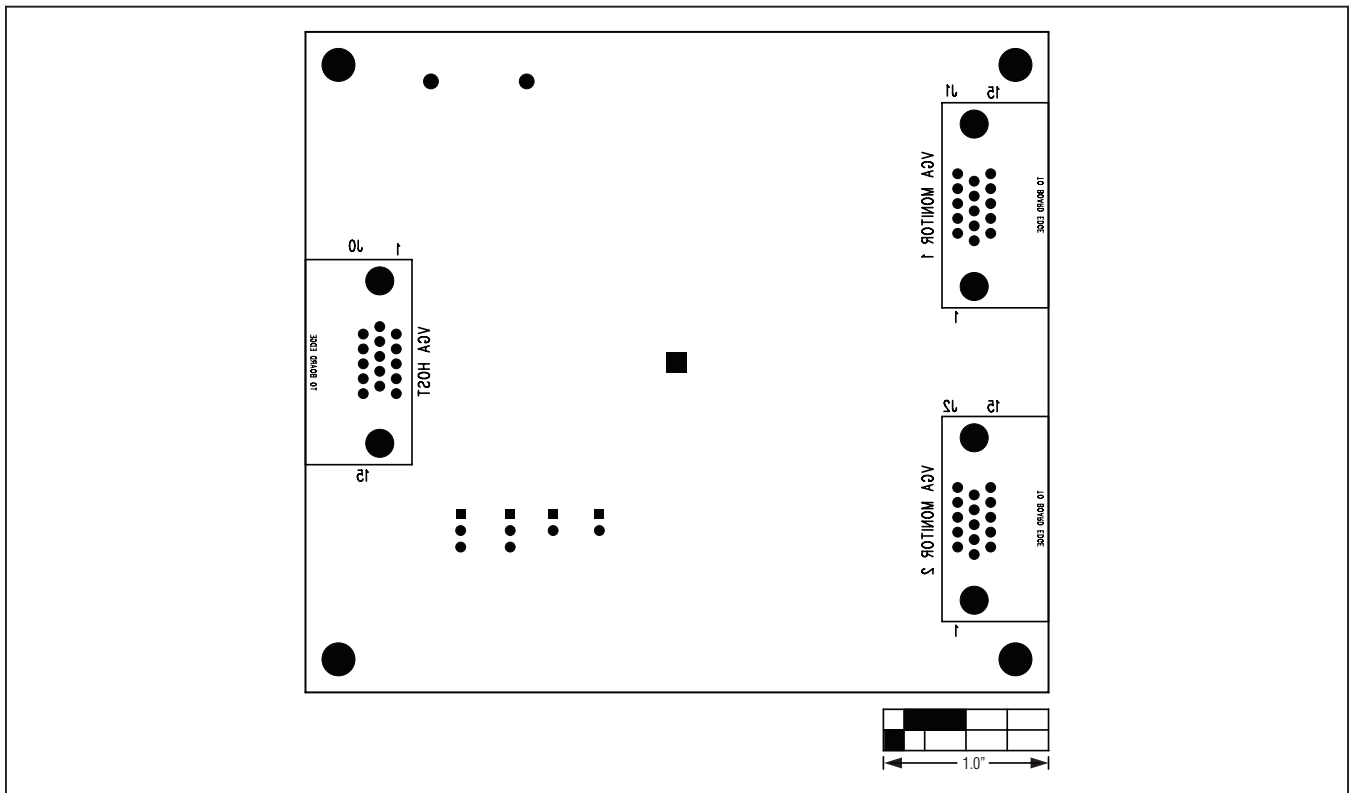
MAX14983E EV Kit Component Placement Guide—Bottom Silkscreen
